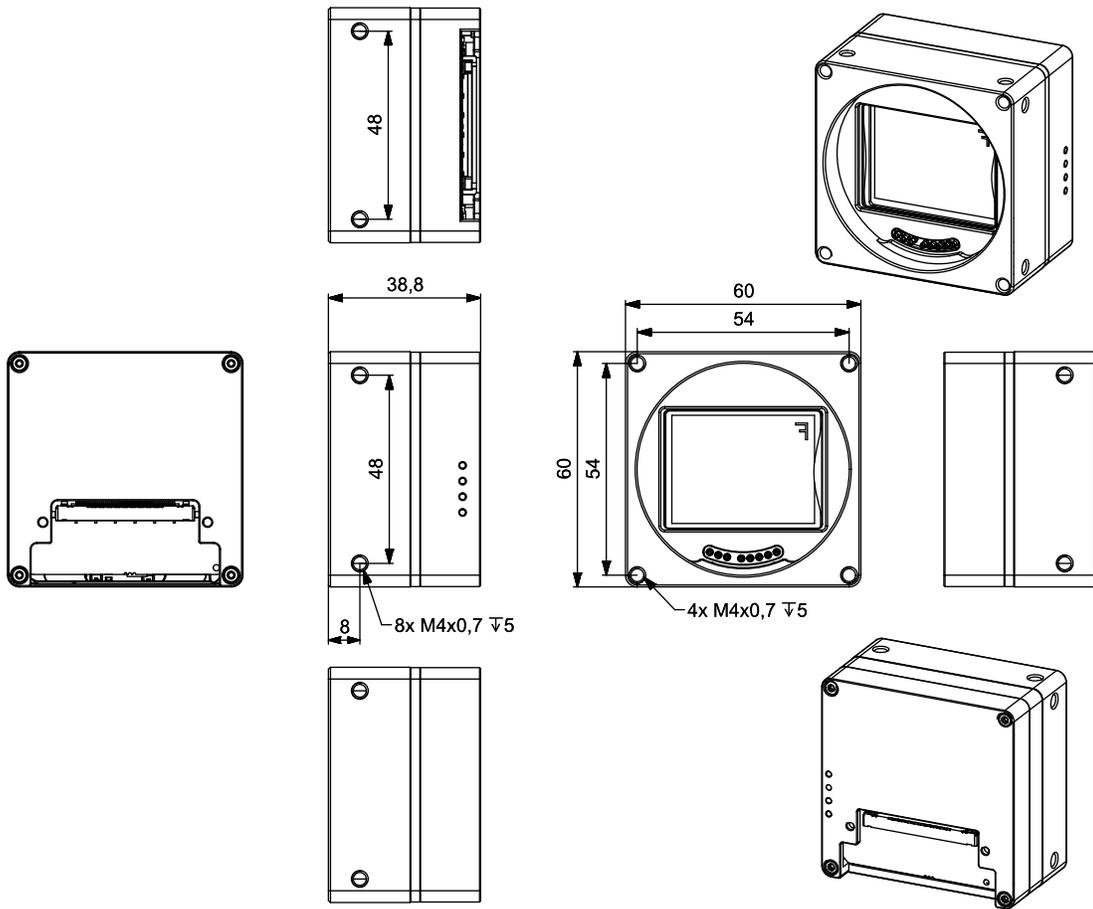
Dimensional drawing of MX500xG-CM-X4G2-FL
